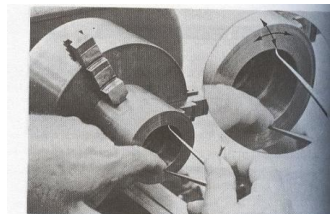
Adjusting an inside caliper to the size of a hole.
